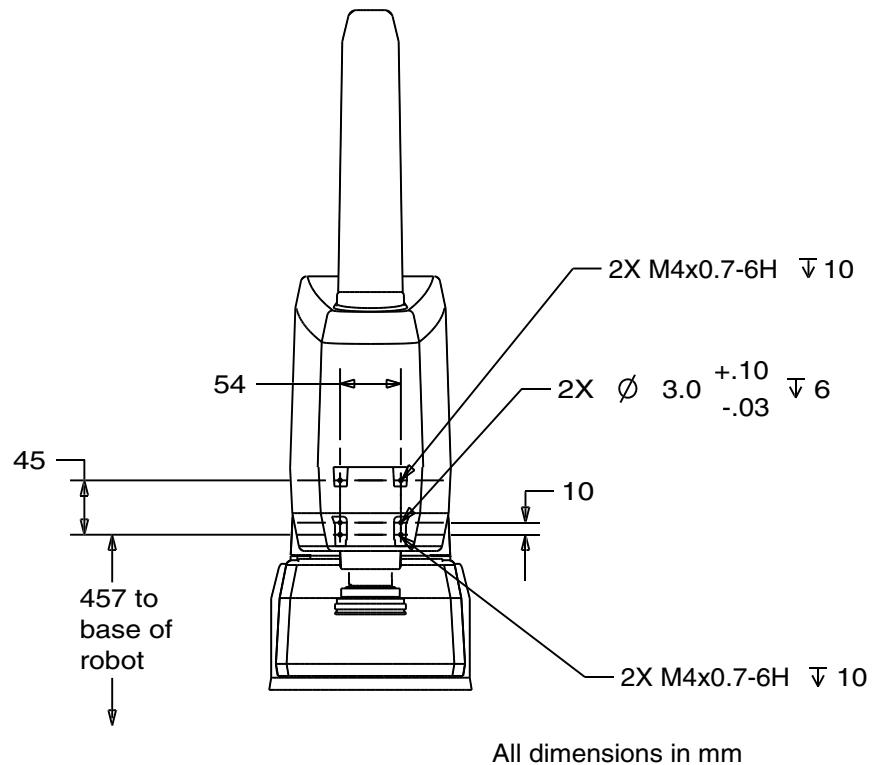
Dimensions of the Camera Bracket Mounting Pattern
